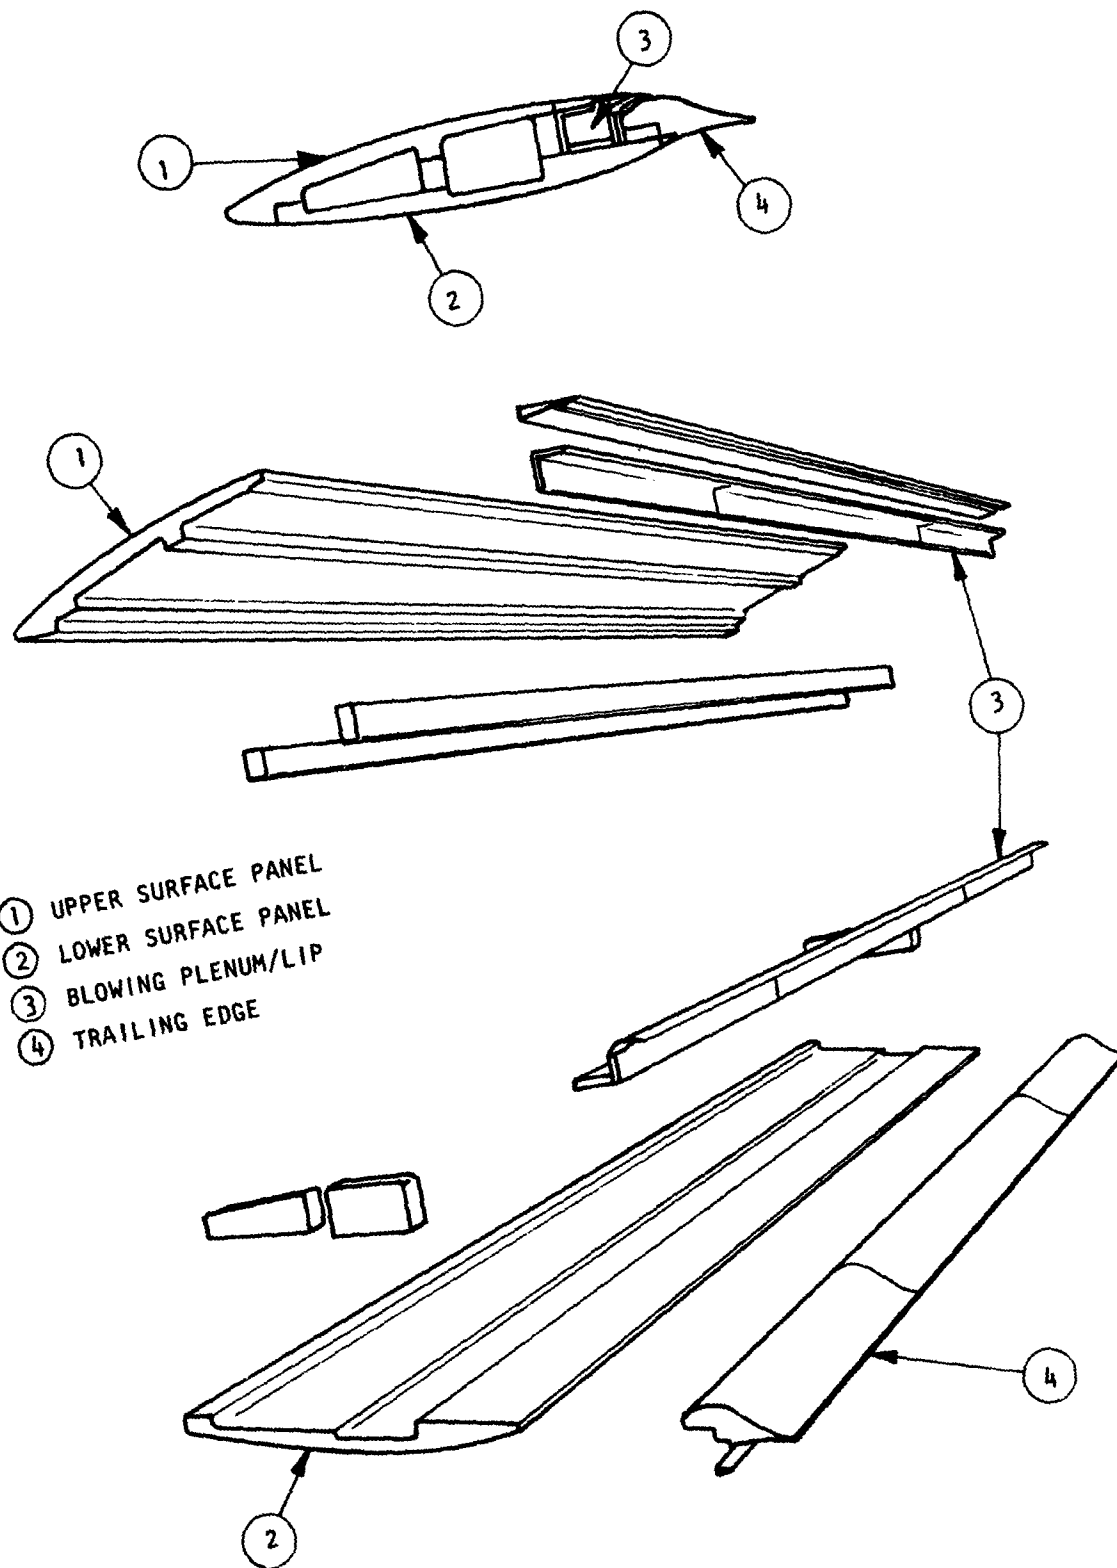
ATC AIRFOIL ASSEMBLY
